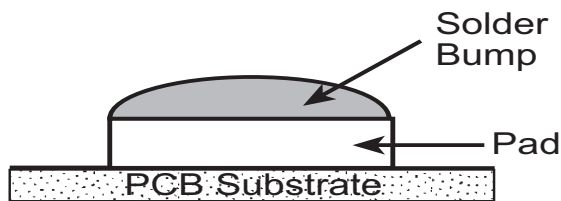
Creating a Solder Bump to Solder a Surface-Mounted Chip Component on a Pad
